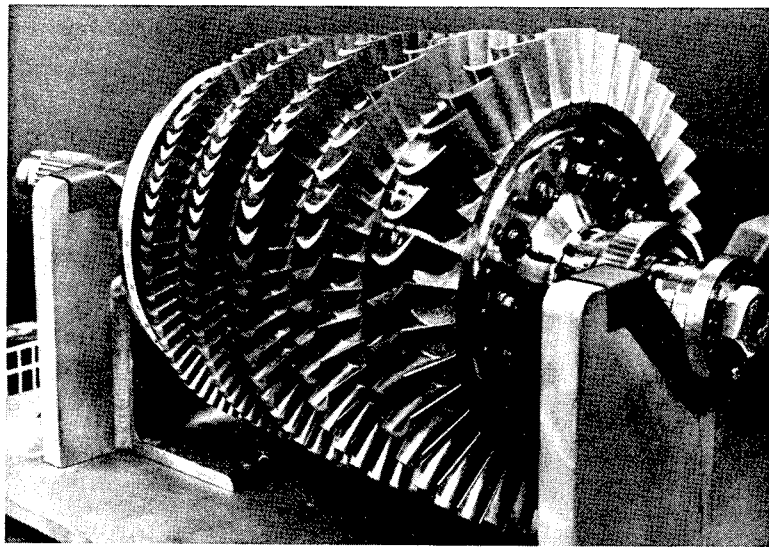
Mark 25 five-stage rotor assembly utilizing outboard bearings.
